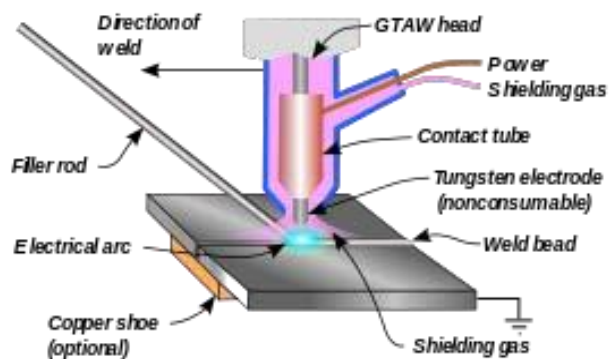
Gas-Tungsten Arc Welding (GTAW) Process
